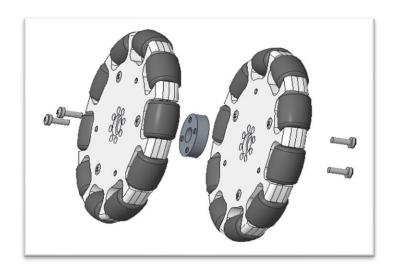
Unassembled view of one wheel assembly (Make two of these)
